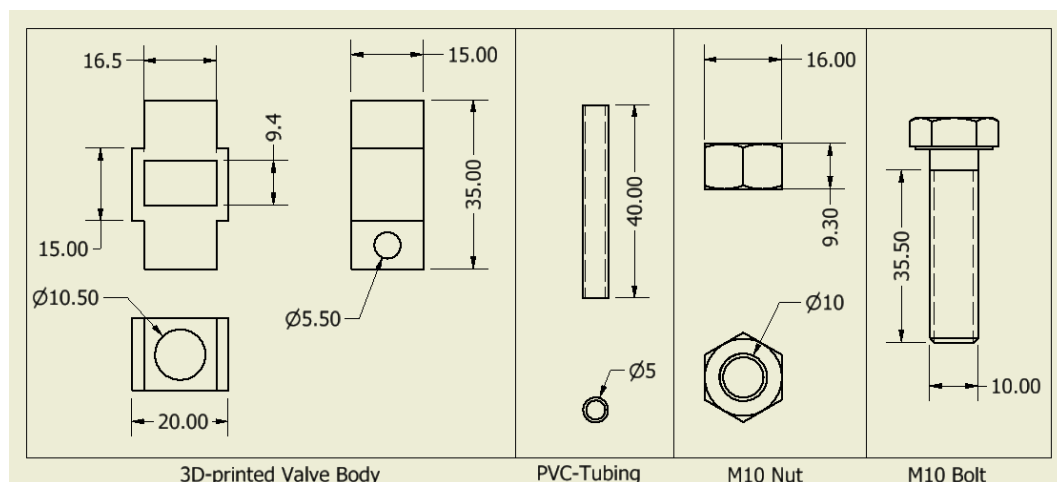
Individual Components Forming the Throttle Valve Assembly with Dimensions Shown
